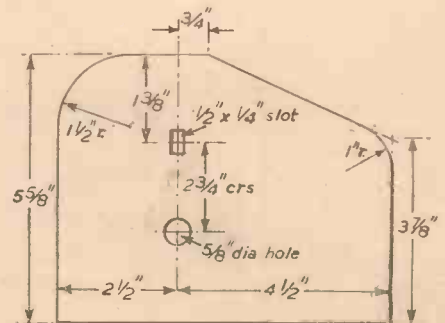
The right-hand side of cabinet. The drill holes are shown in Fig. 2.
